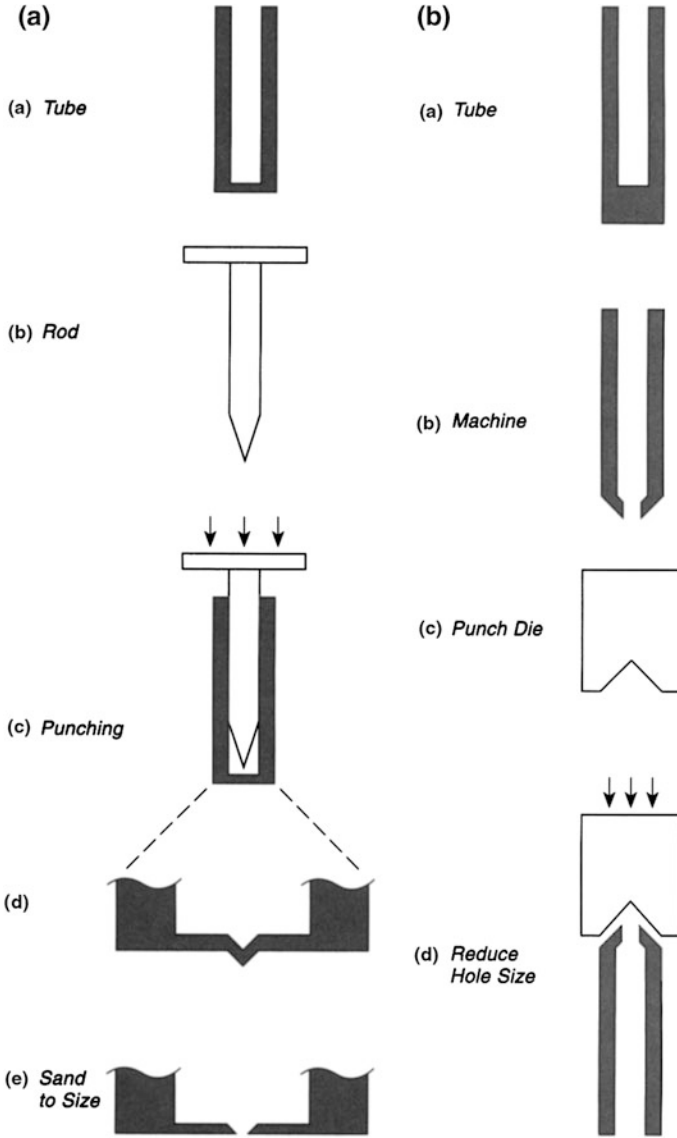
Making micron-size holes for supersonic nozzles. a Method I. b Method II
